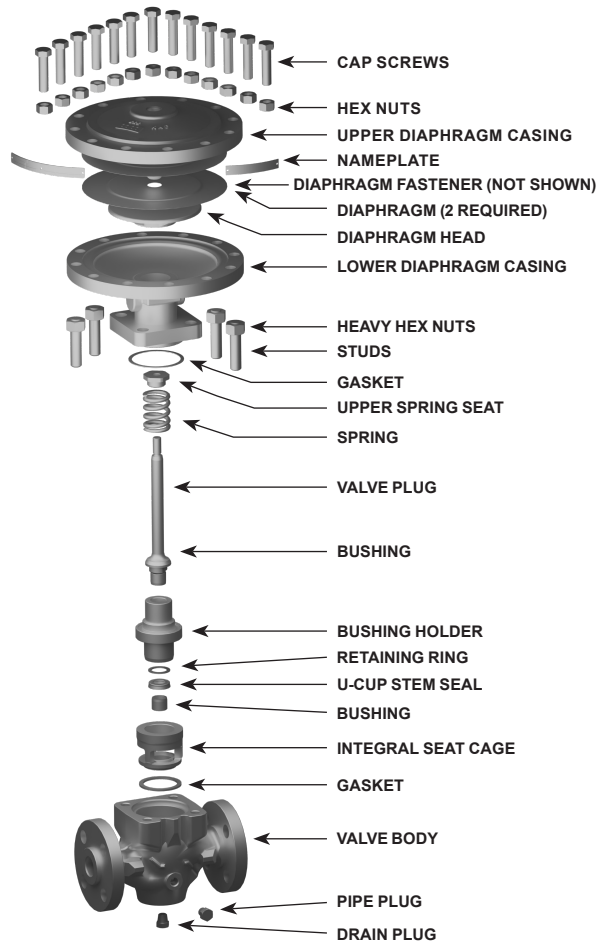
Type 92EZ Pressure Reducing Valve Exploded View
